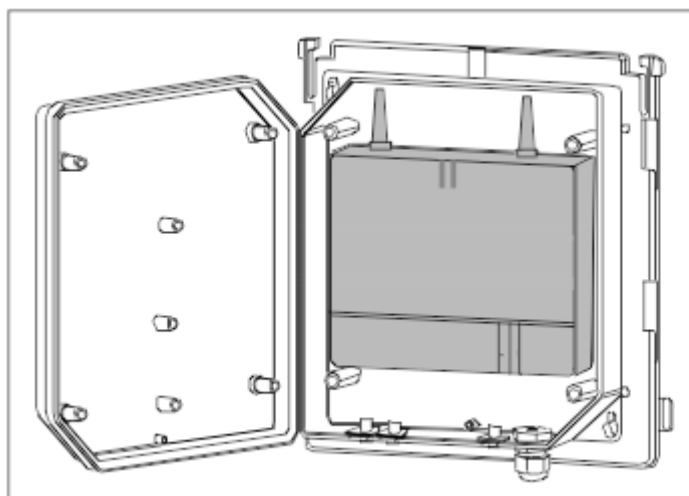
Outside Housing S30122-X7469-X2 with Base Station BS5
